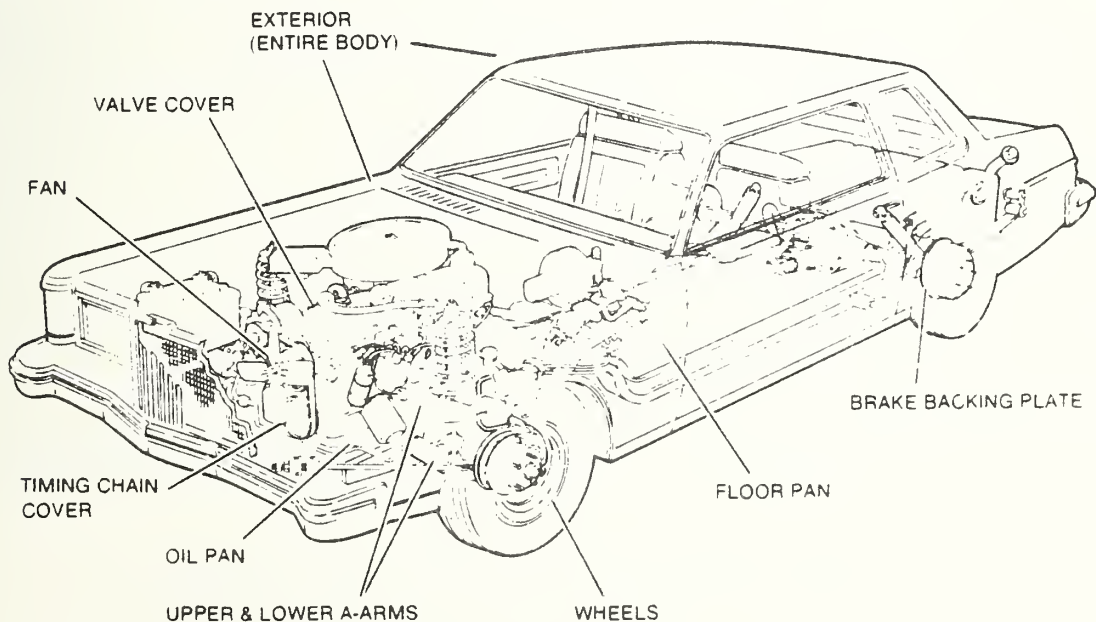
MAJOR STAMPED COMPONENTS
